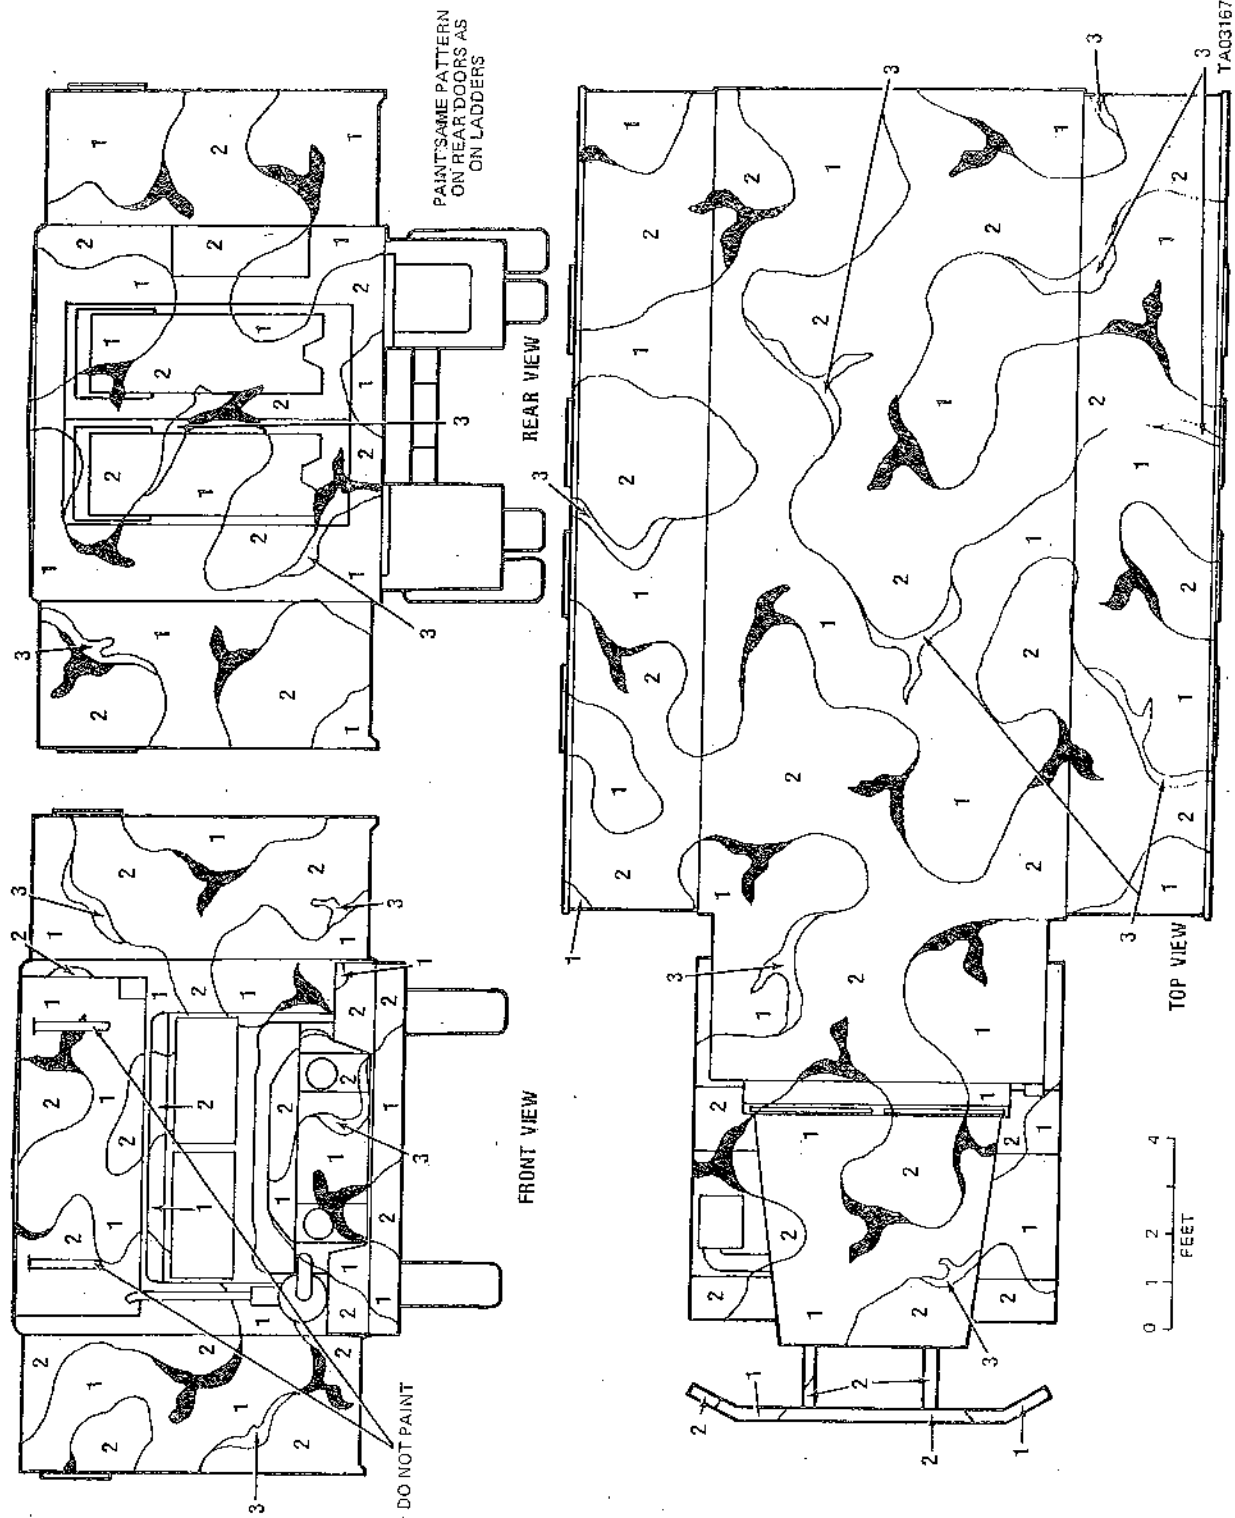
Truck, van, expandable, 2 1/2-ton, M292A2. (1 of 2).
